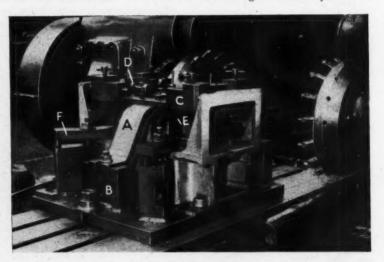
A view showing the fixture and cutters designed and made by Vickers Armstrongs (Engineers), Ltd., for milling the end faces of "clock cases" on an Archdale duplex machine
